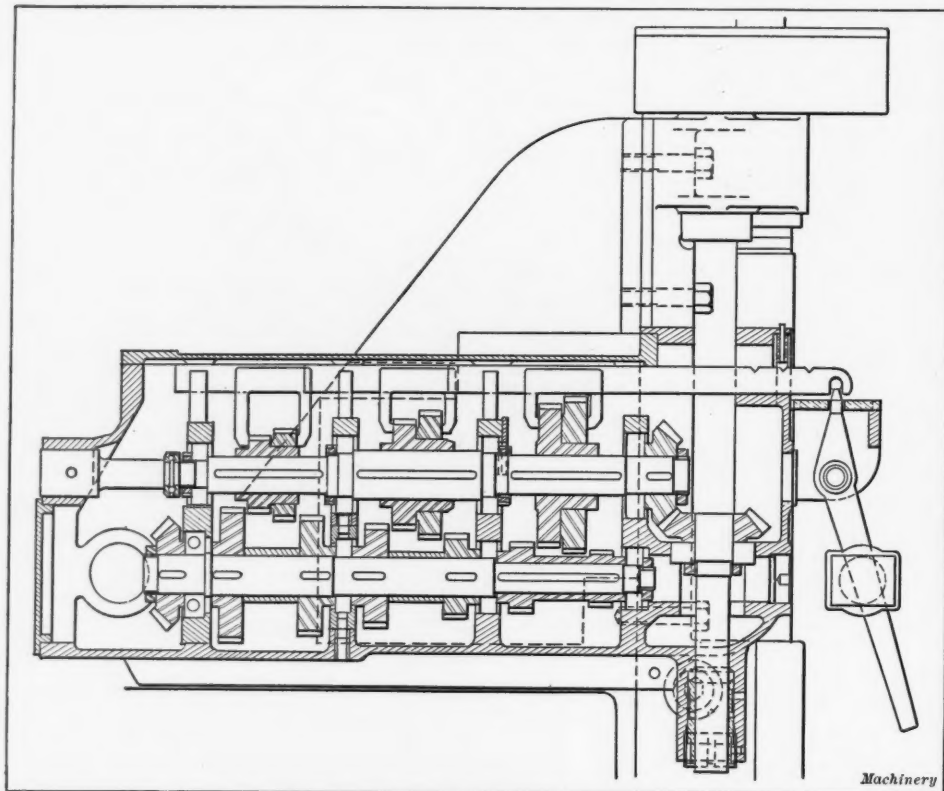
Speed Box on Baker Drill arranged for Right-angle Drive
